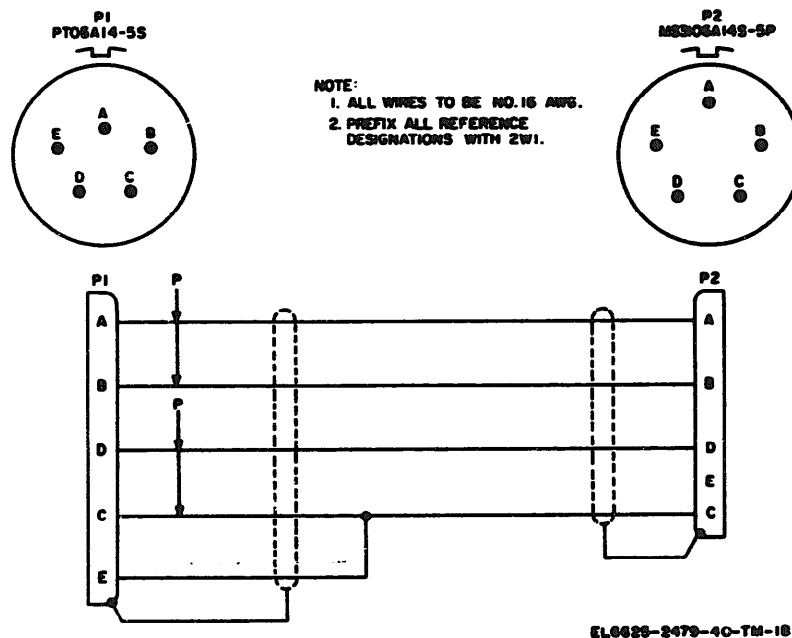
Cable Assembly, Power, Electrical CX-12714/AYH-3, wiring diagram.
